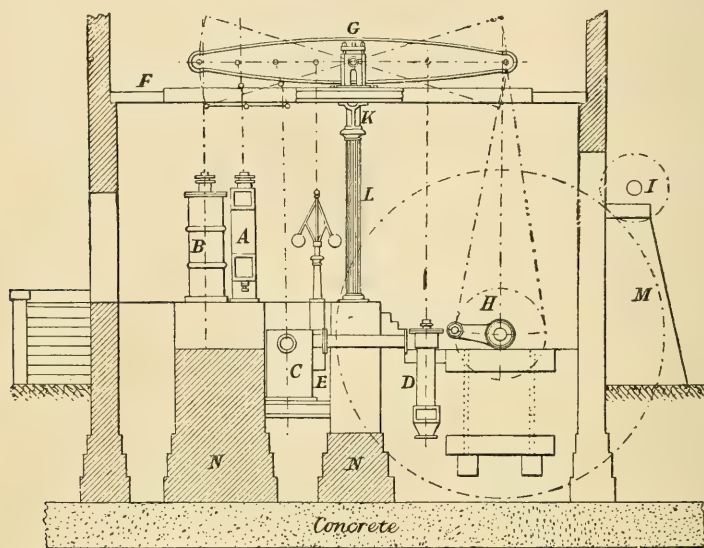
High and Low Pressure Combined Beam Engines of 80 horse-power collectively.
